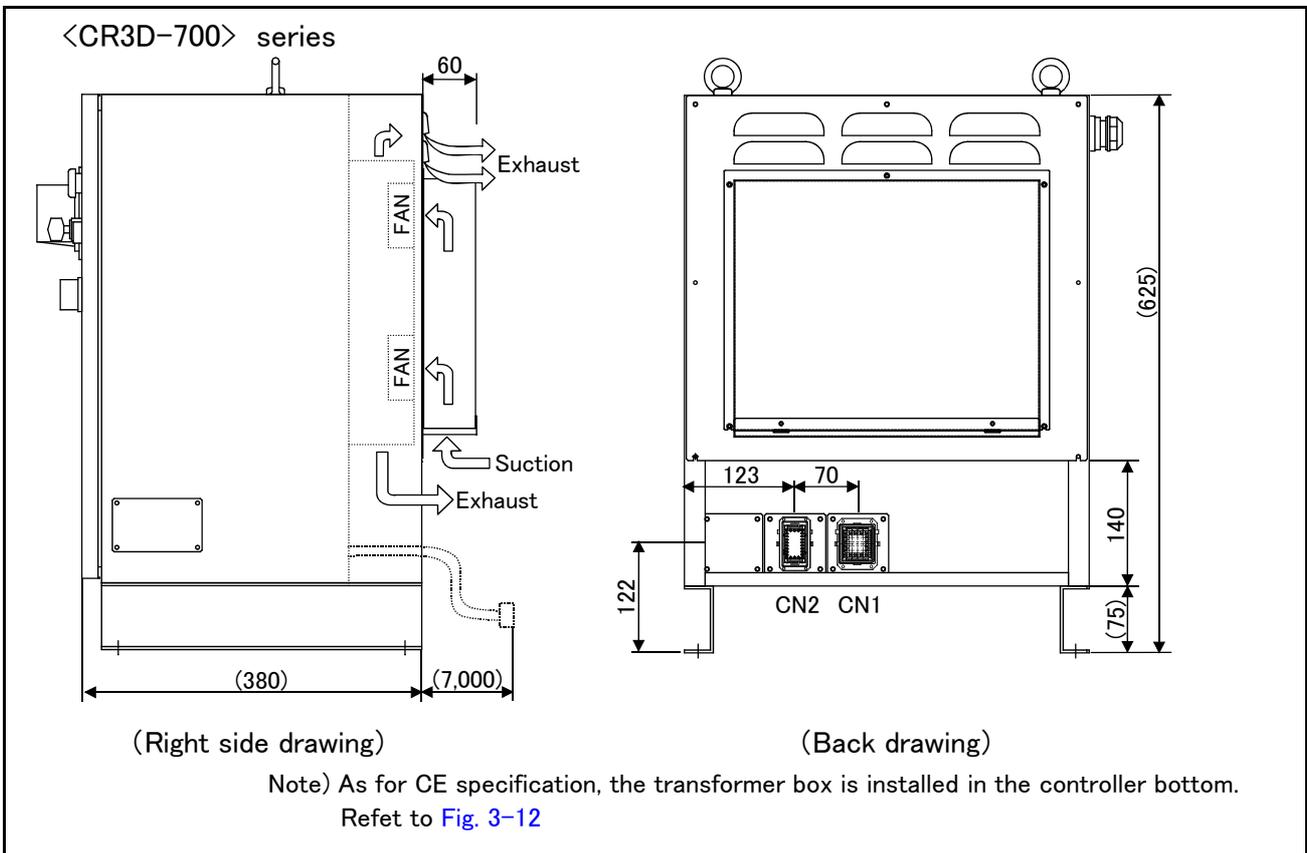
Outside dimensions of controller (CR3D-700 Supplement)
